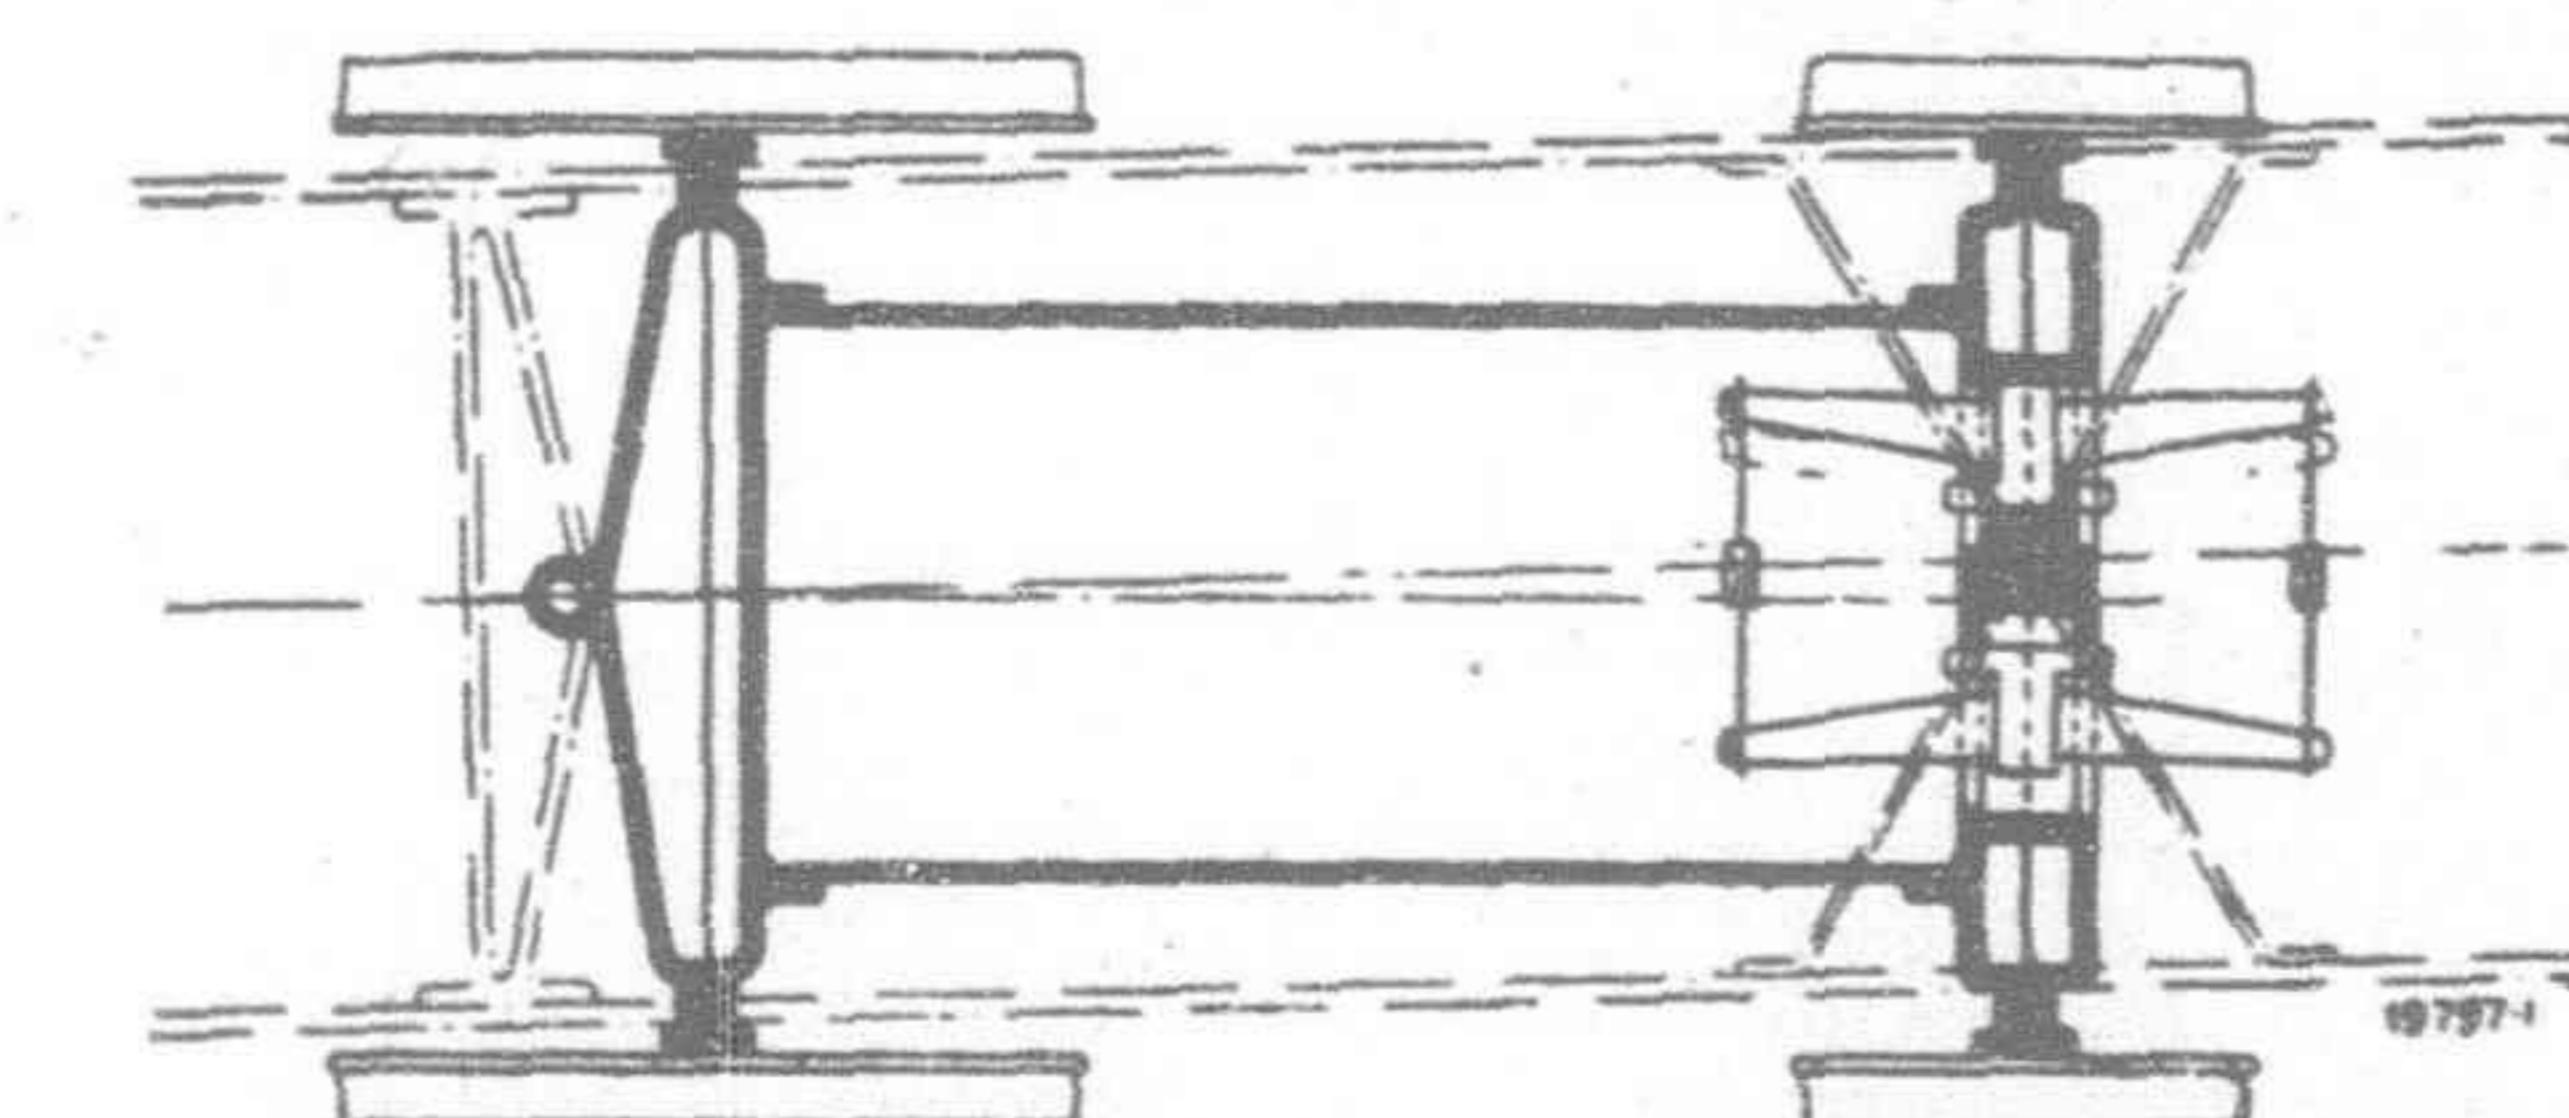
Diagrammatic View of Bogie with Spring Centring, Driving Axle with Brown Boveri Individual Axle Drive, and Pony Axle
